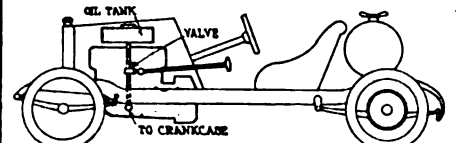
Extra oil tank at top of motor, supply from which is controlled by a valve
